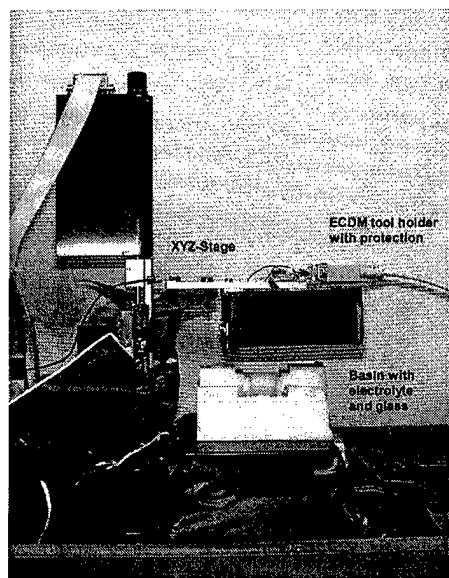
Experimental set-up with the ECDM tool holder mounted on a XYZ-stage
